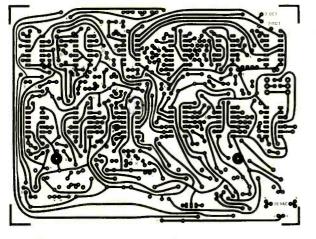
FOIL PATTERN of single-sided PC board shown half-size.
